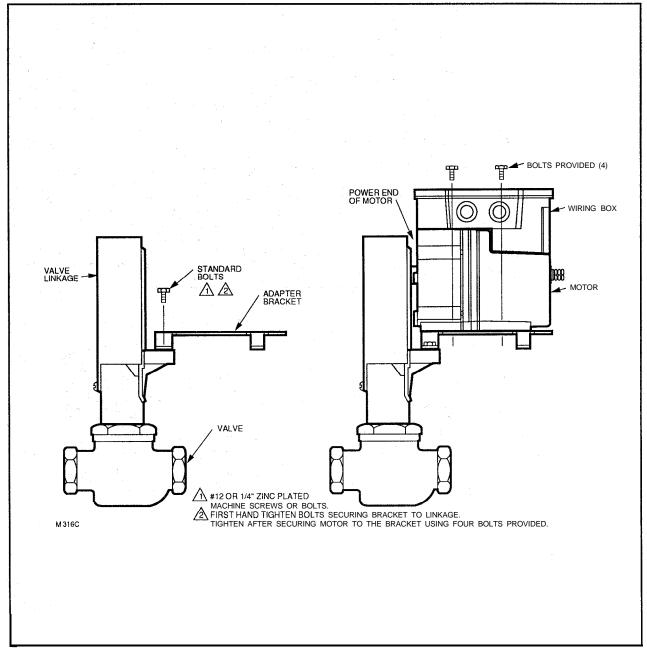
MOTOR MOUNTING ON VALVE LINKAGE,
